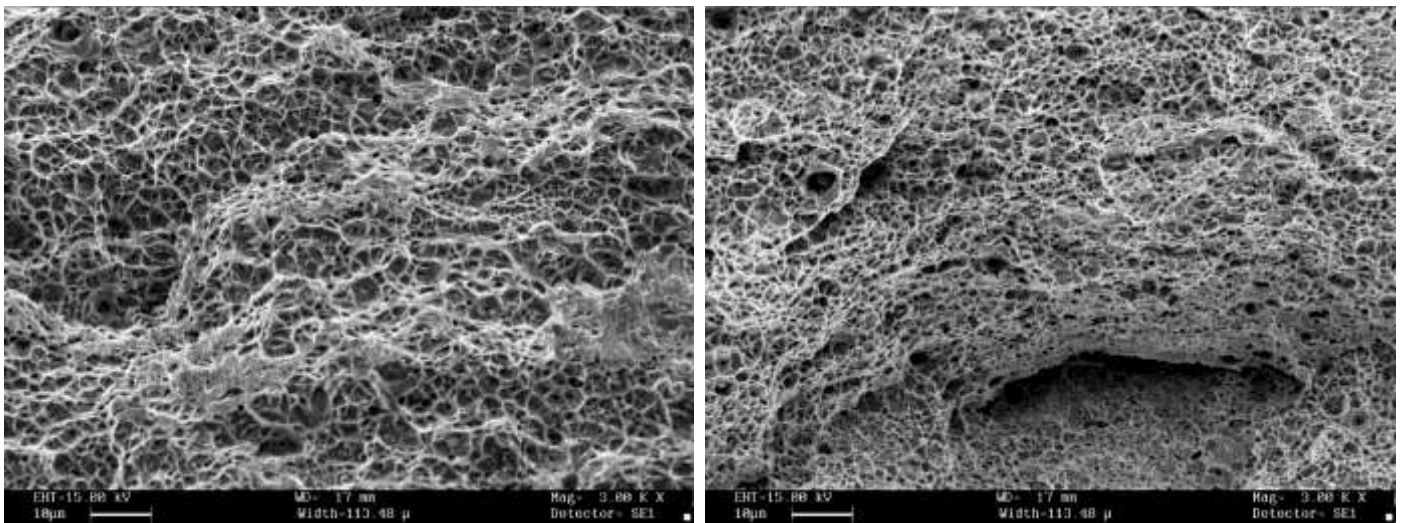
SEM picture of MIG welded sample 'austempered' fracture surface
